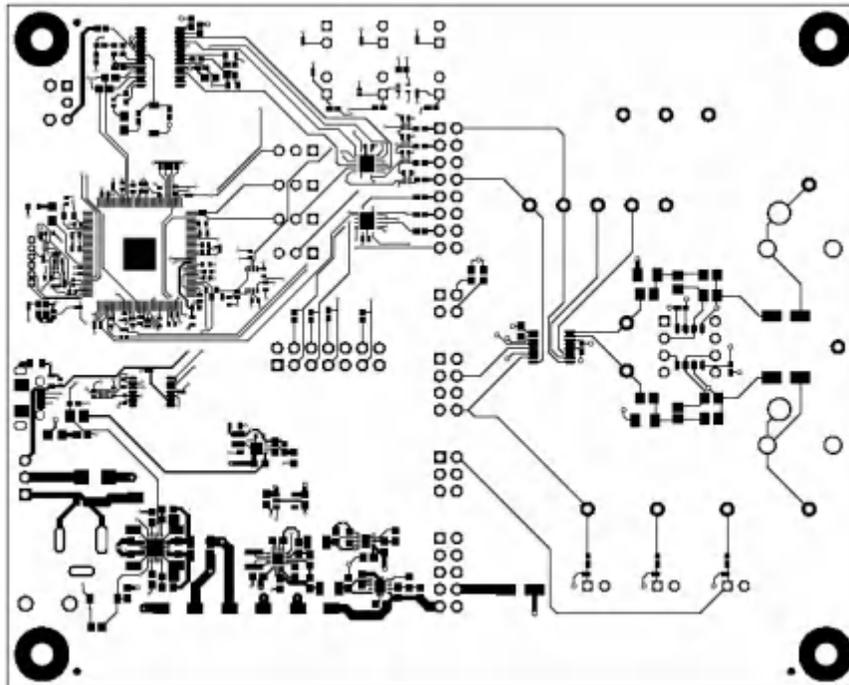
PCM175xEVM PCB Top Layer Layout
